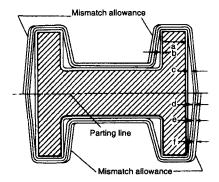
Application of tolerances and allowances to forgings. The dimensions are not to scale. a, finish machined; b, machine allowance; c, draft allowance; d, die wear tolerance; e, shrink or length tolerance; f, mismatch allowance
